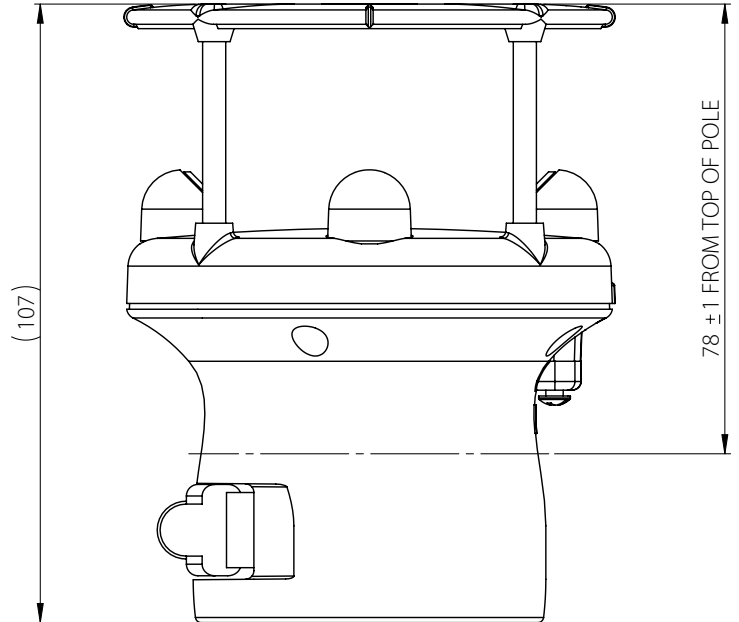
Side view of sensor with 44-51 mm (1.75-2") pole mount, with dimensions
